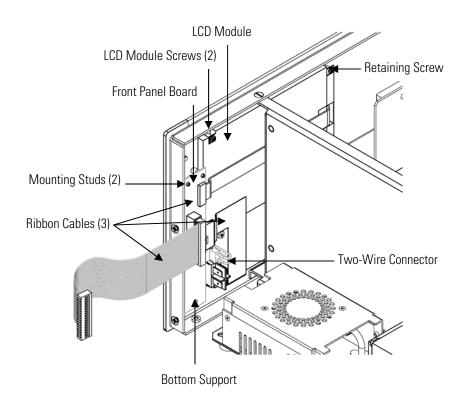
Replacing the Front Panel Board and the LCD Module
